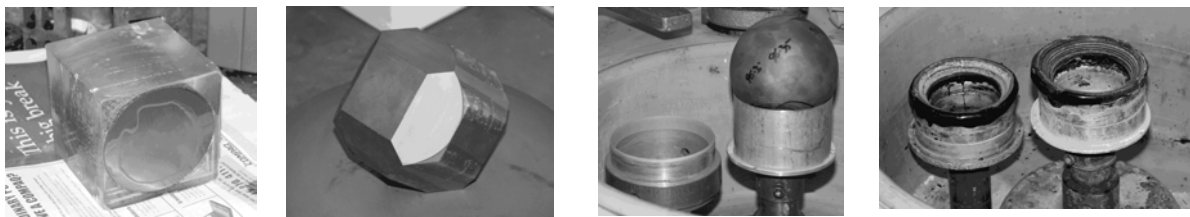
Sphere fabrication stages (left to right); cementing a cylindrical boule into a glass block; removing corners/edges with a milling machine; a sphere during the smoothing stage; and tool faces coated with an optical pitch for polishing
